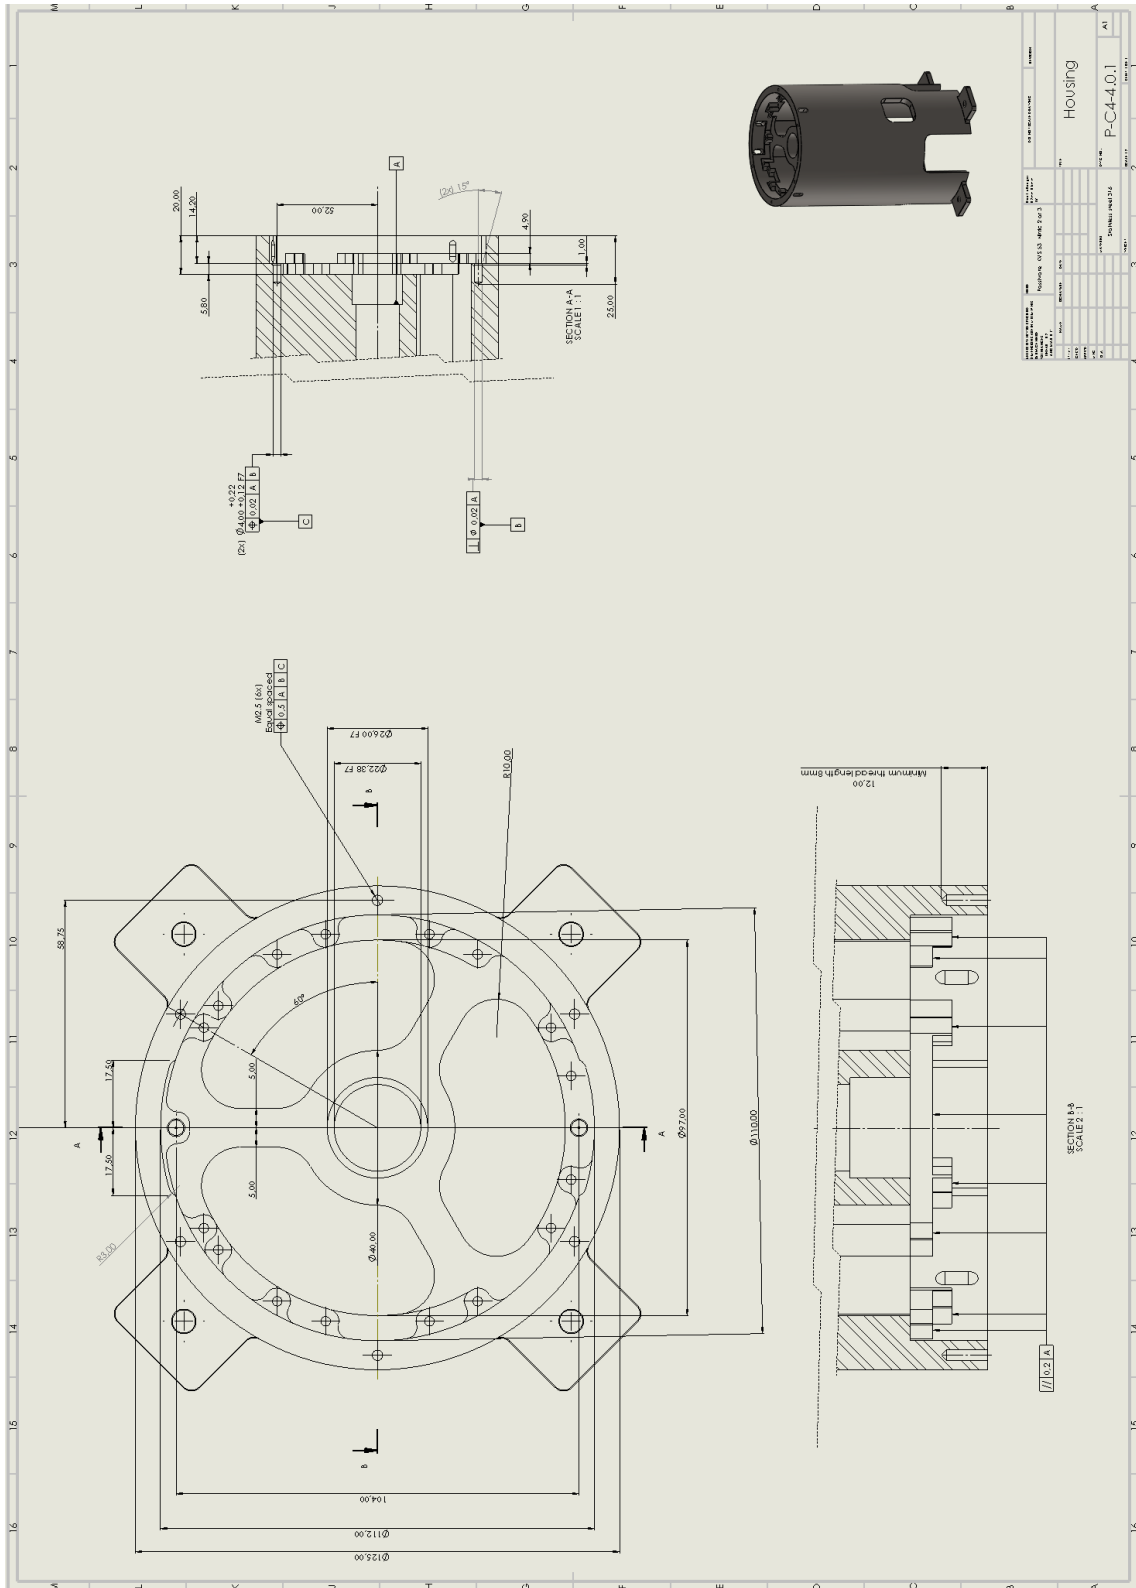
Housing measures and tolerances, sheet 1, 2D
